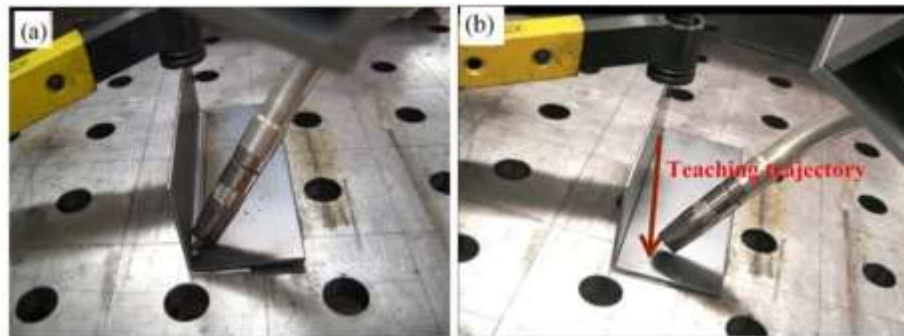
A weld seam tracking for a fillet joint: (a) welding results, (b) teaching trajectory. [11]
